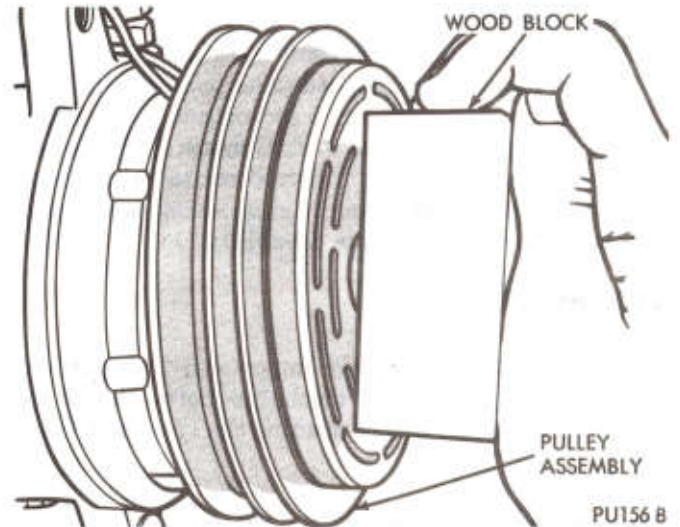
Installing Pulley Assembly, C-171 Compressor
